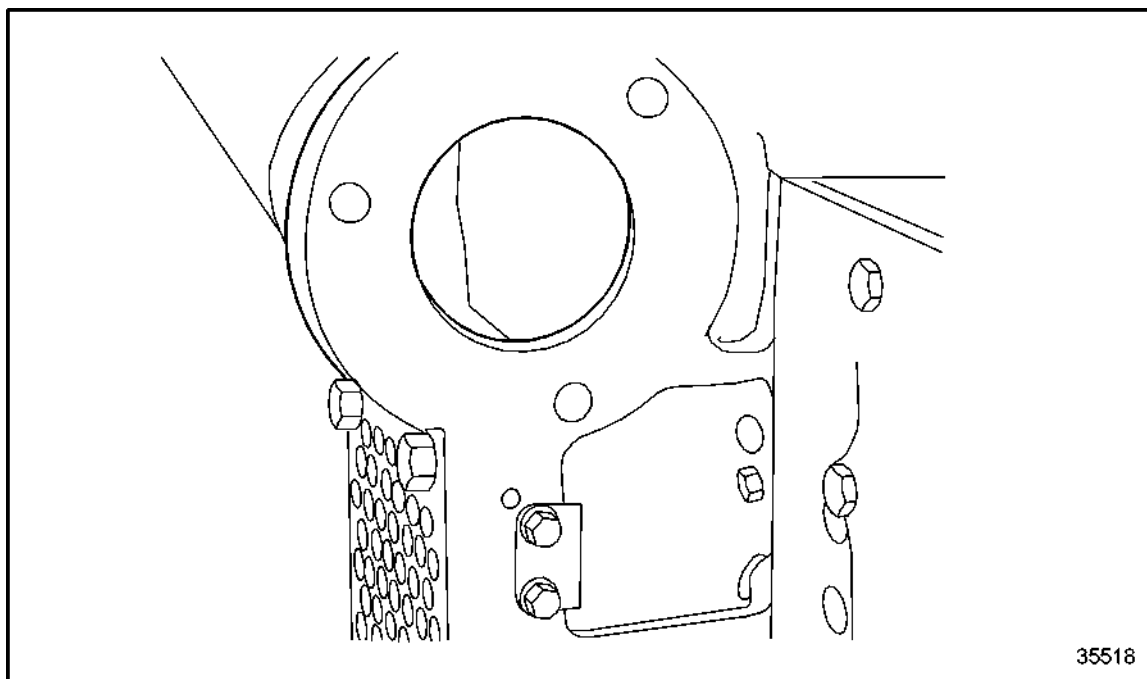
Inspecting Mating Surface on Flywheel Housing for Wear.
